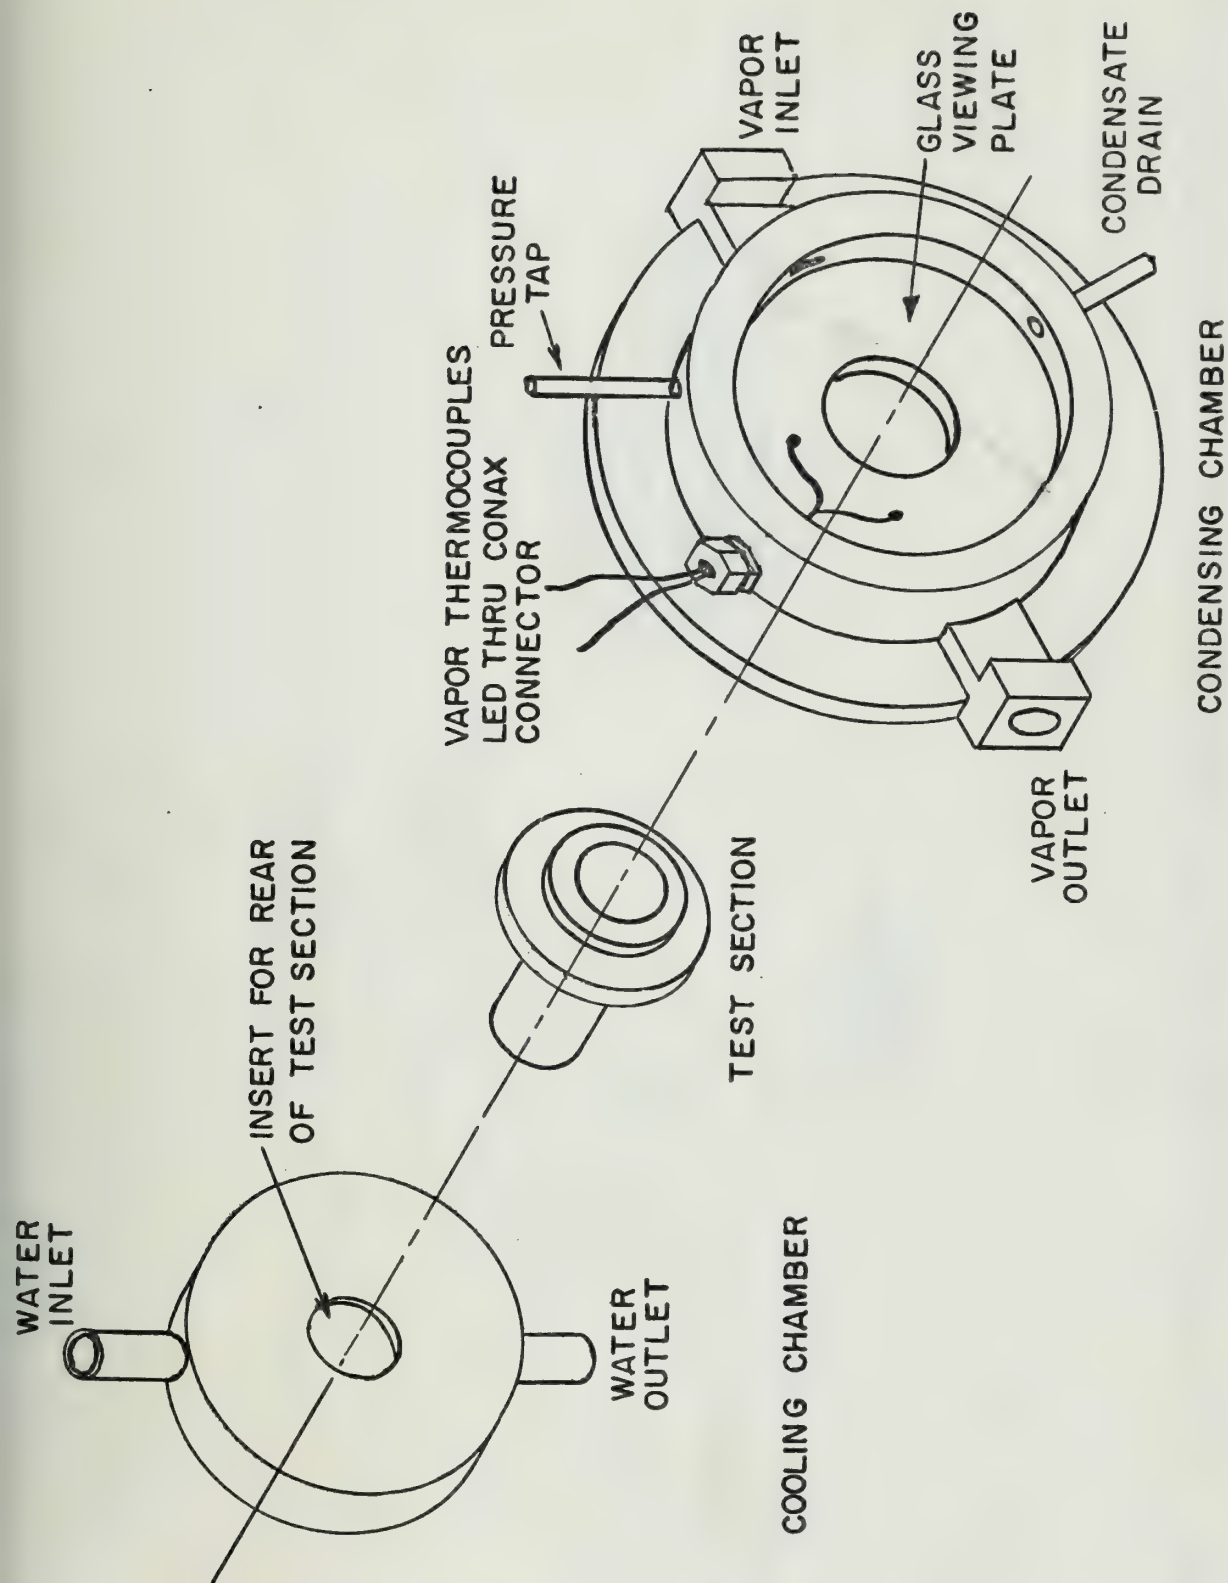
CONDENSING CHAMBER-TEST SECTION-COOLING CHAMBER ASSEMBLY
